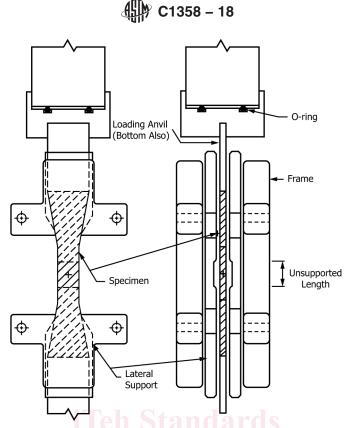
Example of a Controlled Face Supported Fixture (4)Controlled, Face-Supported Fixture (4)
